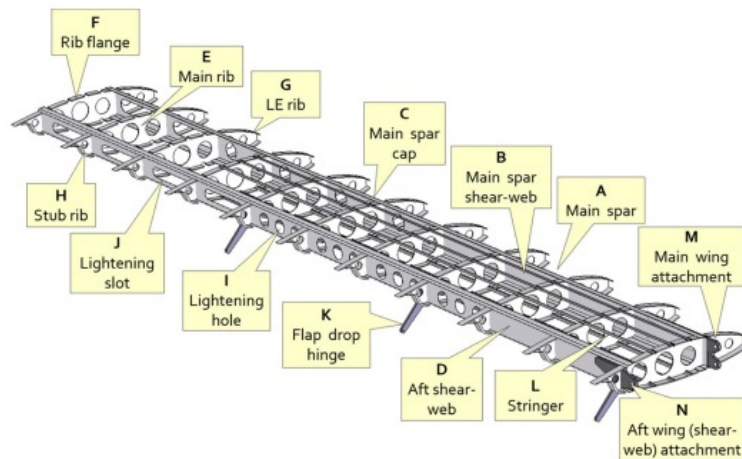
A simple schematic of a typical structural layout of a wing for General Aviation aircraft.
